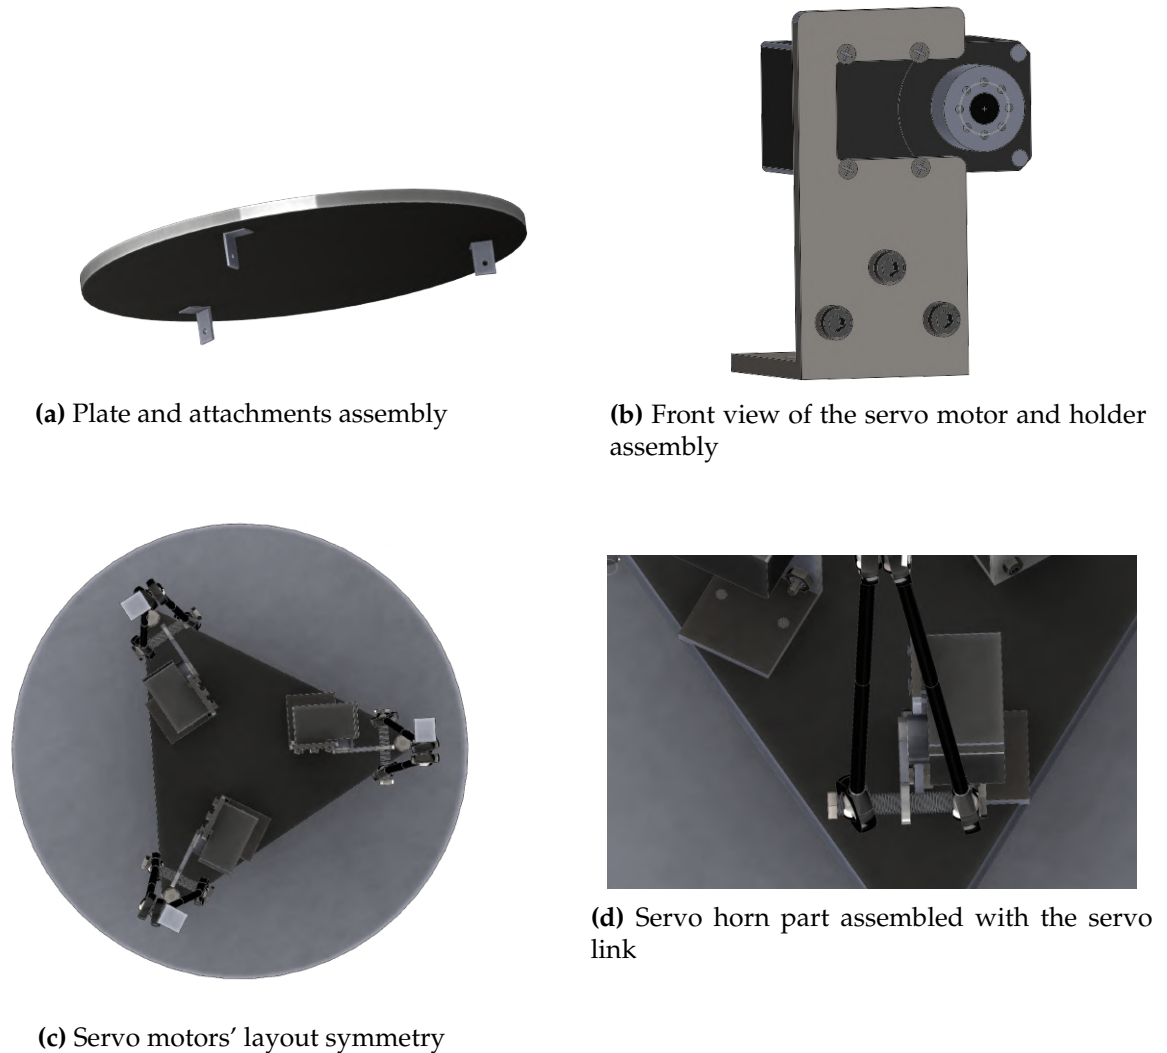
Assembly of the different parts of the parallel robot prototype
